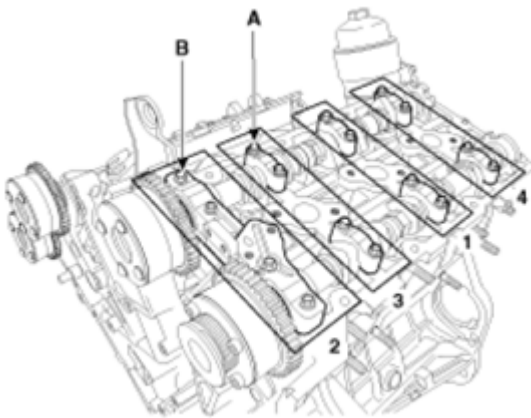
Identifying Camshaft Bearing Cap And Thrust Bearing Cap
